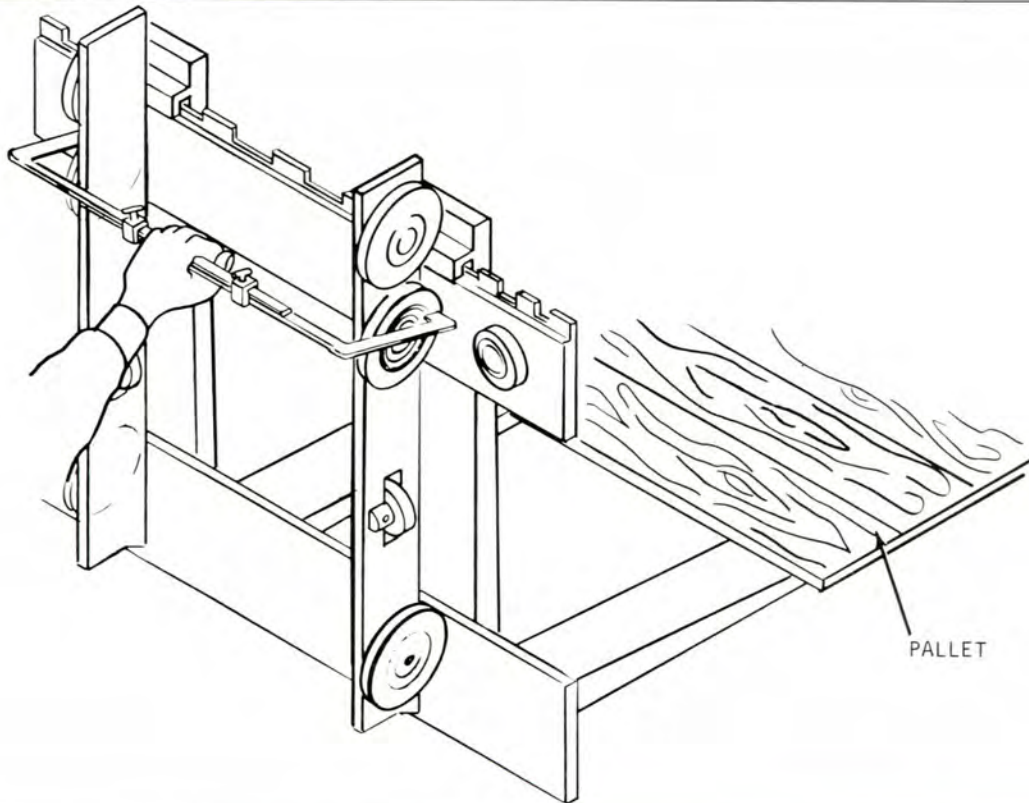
Spanning Upper Rollers (Six Roller Carriage)
